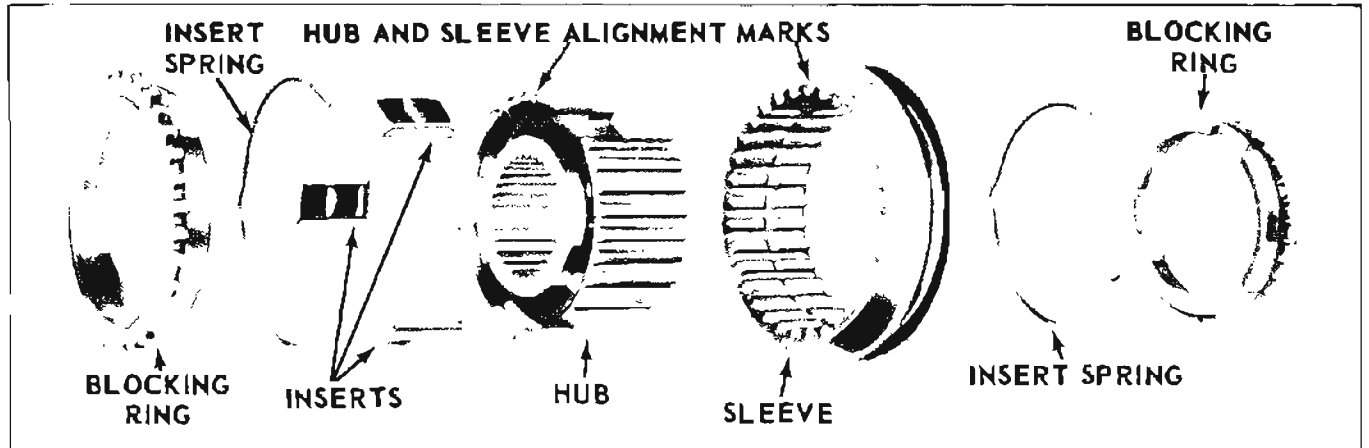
Exploded View of 2nd - 3rd Synchronizer
